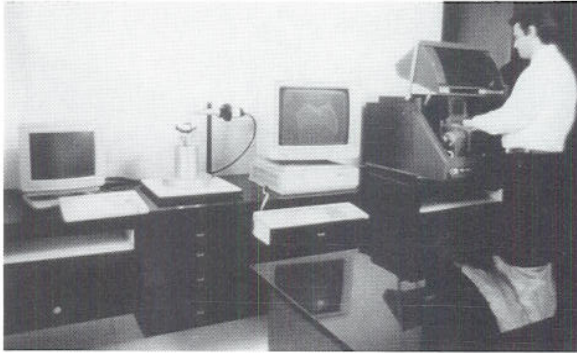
The Sopha CAD/CAM (we find the three elements of the CAD/CAM: *left*, optical probe; *middle*, CAD station; *right*, CAM machine).
